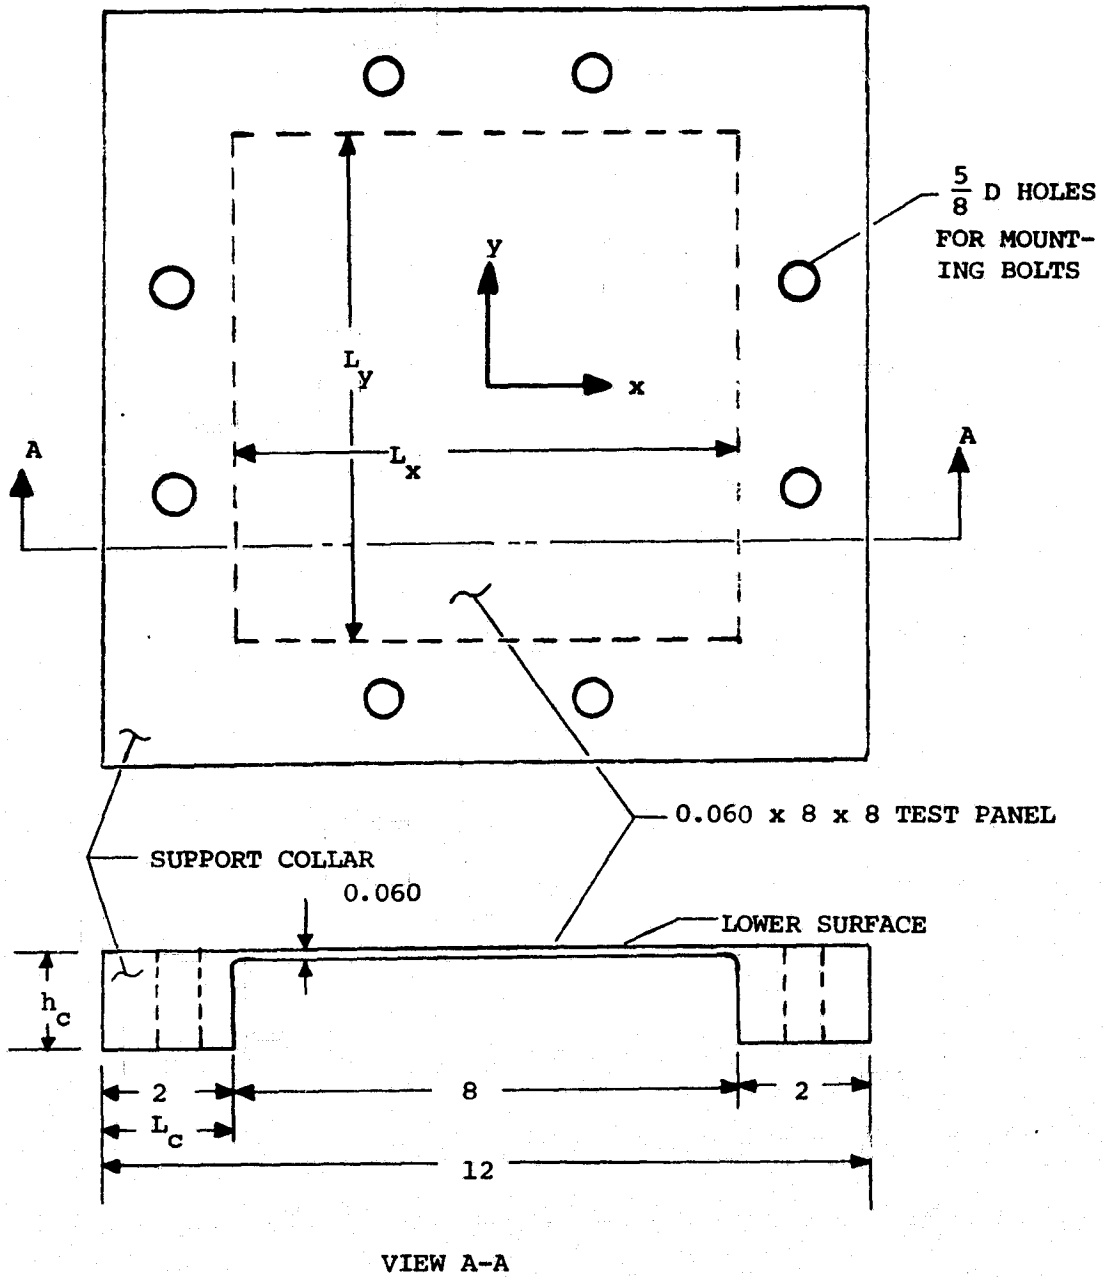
GEOMETRY AND NOMINAL DIMENSIONS OF THE UNIFORM-THICKNESS 6061-T651 ALUMINUM PANEL MODELS
